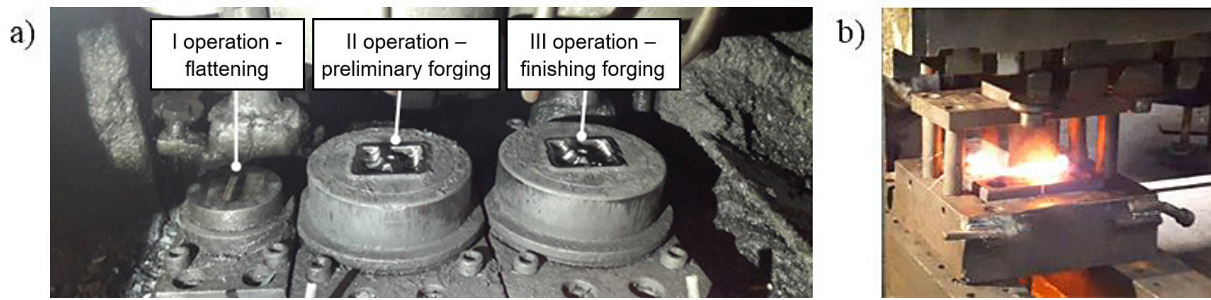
Images of: a) the die inserts, b) the process of trimming the flash on a blanking die
